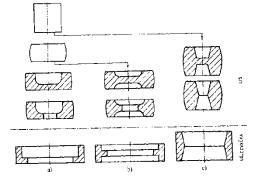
Manufacture of shaped pre-forged pieces via open-die forging: a) pre-forged piece for a ring of L profile, b) pre-forged piece for a ring of T profile, c) pre-forged piece for a ring with internal conus
